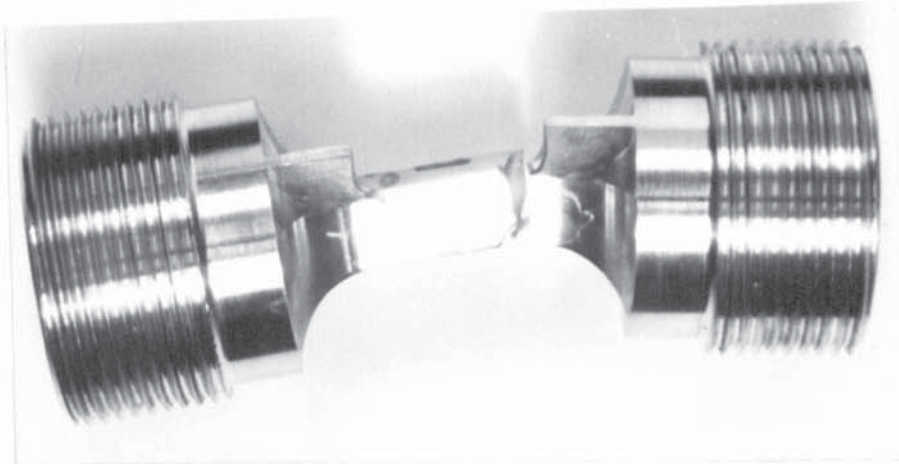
Failure of Short Corner-Crack Specimen.
